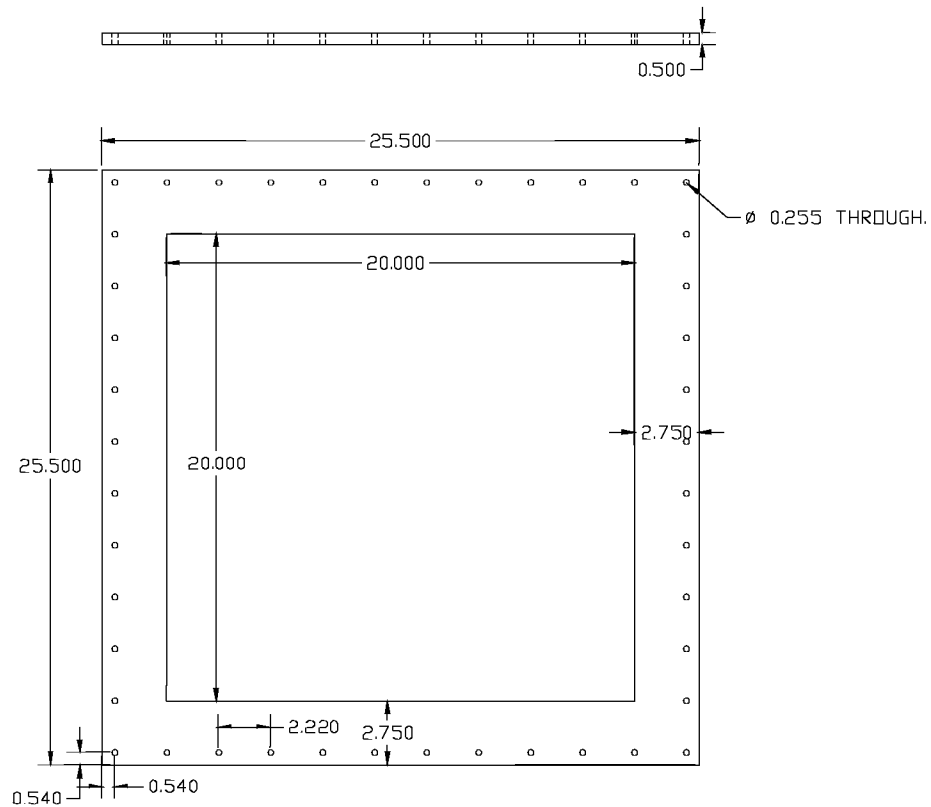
Sample test specimen with dimensions and tolerances.
